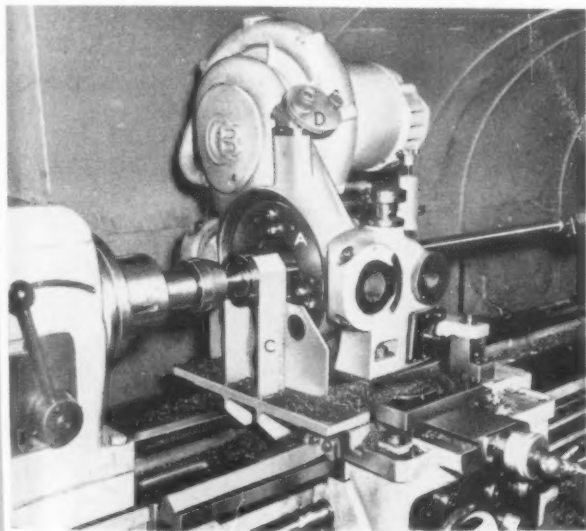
View, from the Headstock End, of a VDF Lathe Fitted with a Burgsmuller Type L3 Thread Whirling Attachment for the Production of Lead Screws
